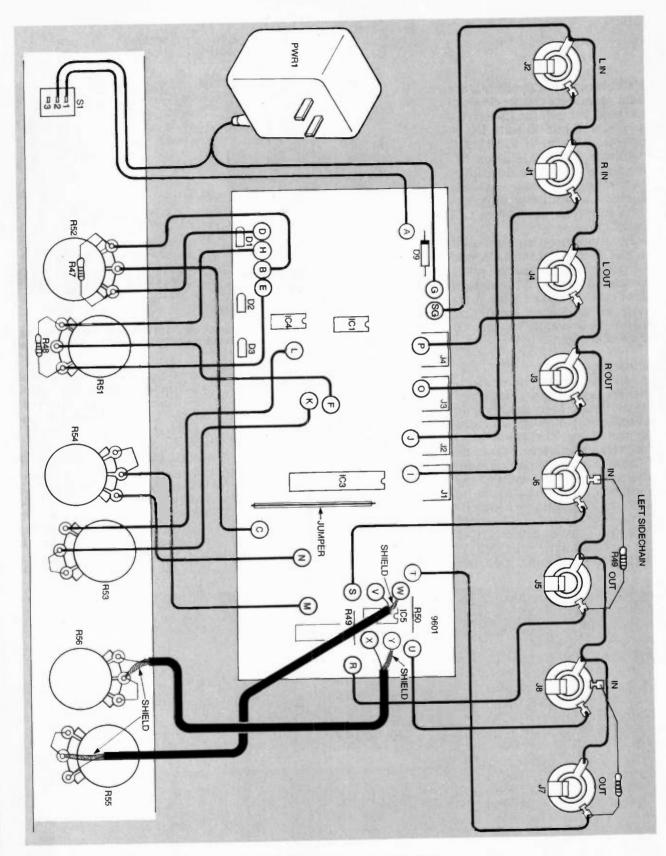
INTERCONNECTING THE PC BOARD with the front and rear panel parts is simplified by PC board circled markings. The long cable runs from the board's output stage to two front-panel controls, which requires using thin, flexible, audio, coaxlal cables such as the RG-174/U type. The unit's step-down power transformer PWR1 is contained in a wall-plug casing that plugs into a power outlet.
